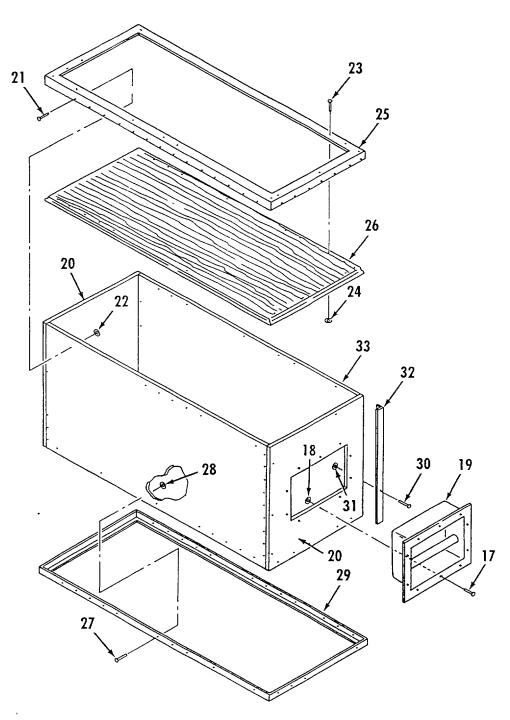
Cover Assembly (Pressure Reducing) Repair (Sheet 2 of 2).
